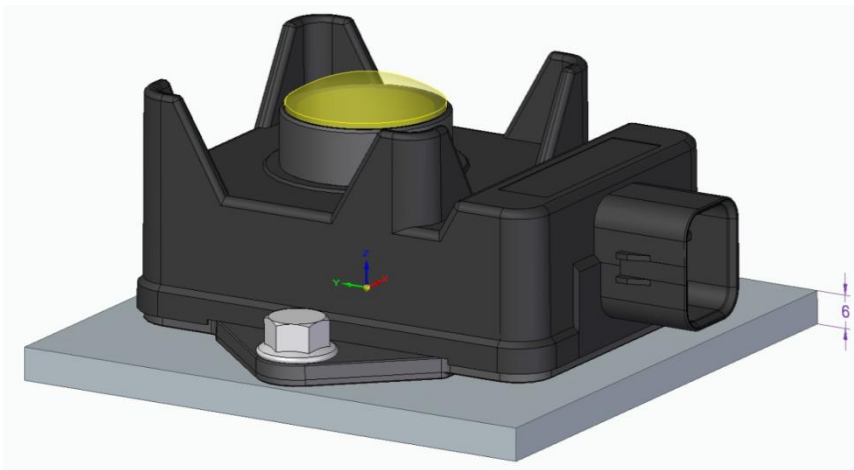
Mounting on a thick soft steel plate ($\geq 6\text{mm}$).
